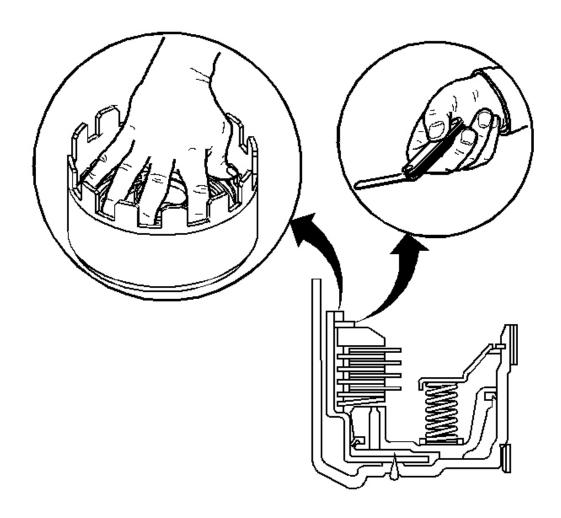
Checking Reverse Input Clutch Plate Travel Courtesy of GENERAL MOTORS CORP.
